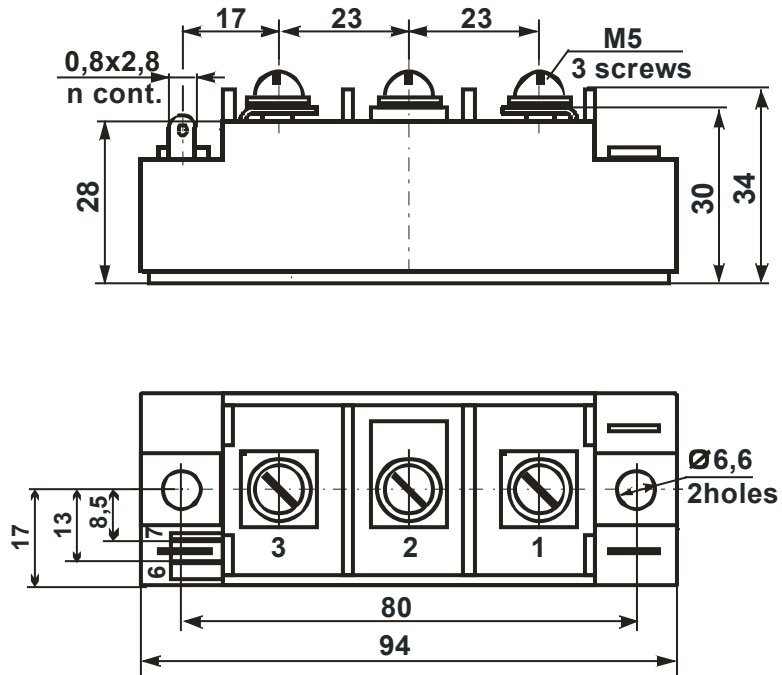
Overall dimensions of modules M10 with version «E2»
